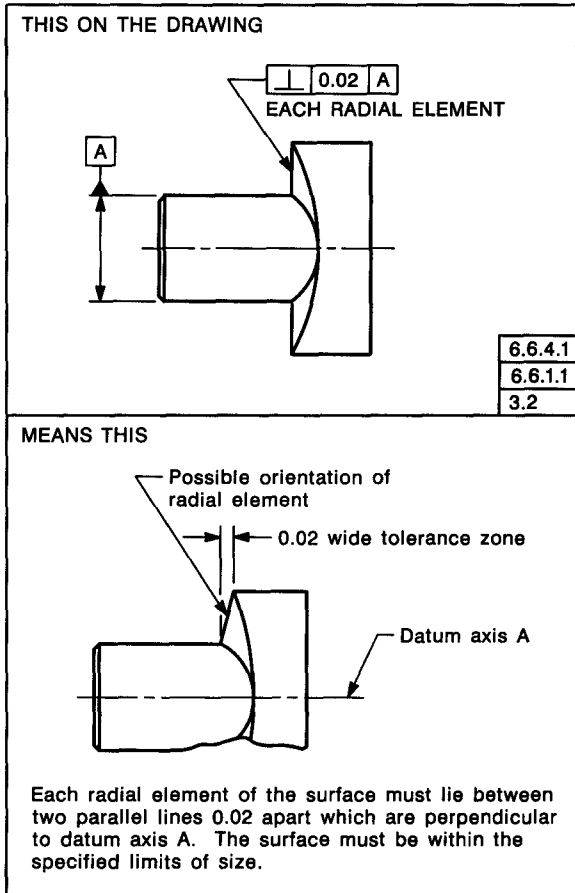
SPECIFYING PERPENDICULARITY FOR A RADIAL ELEMENT OF A SURFACE
